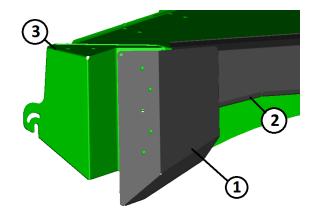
Forming Shield Insert Install Key 1 – Insert Key 2 – Forming Shield Key 3 – Forming Shield Assembly
